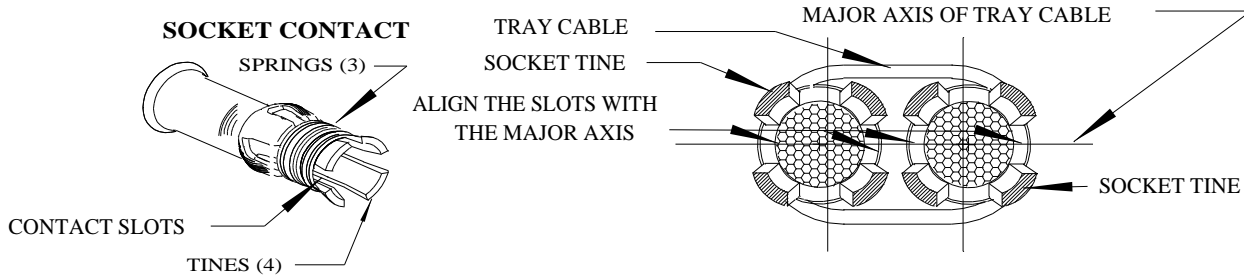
Alignment of Socket Contact Slots with the Major Axis of Tray Cable
